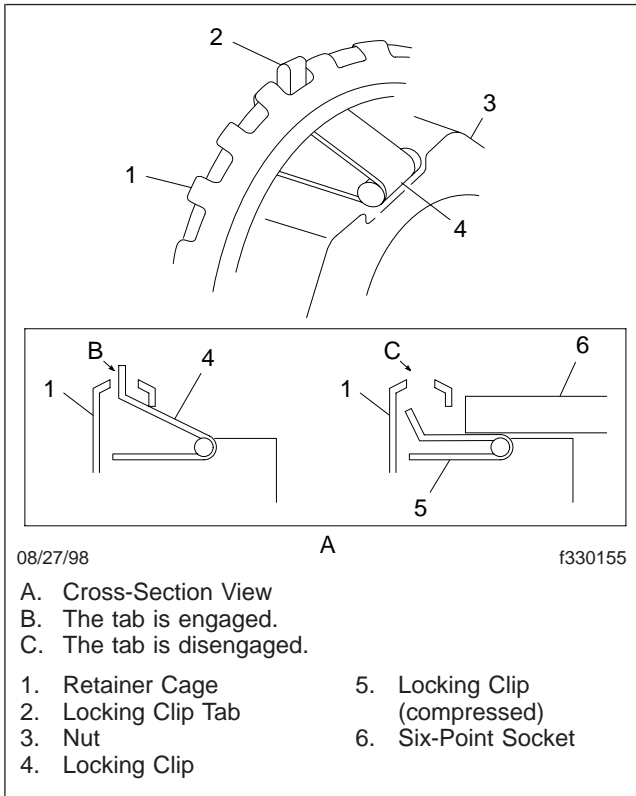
, Axilok Nut, Checking the Position of the Locking Clip
